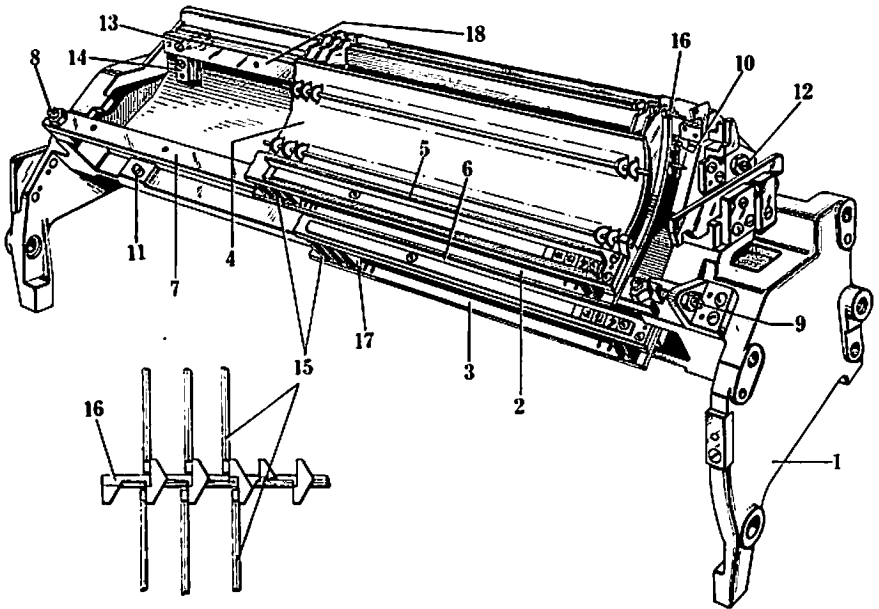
Double Distributor Channel Entrance. The main view indicates how the upper partition plate 2 and the lower partition plate 3 are mounted on the channel entrance frame 1 and also shows the adjusting screws provided for setting the plates vertically and sidewise. The detail drawing is a top view of the automatic stopping bar 16, showing how the upper and lower partitions engage the lugs of the bar.
